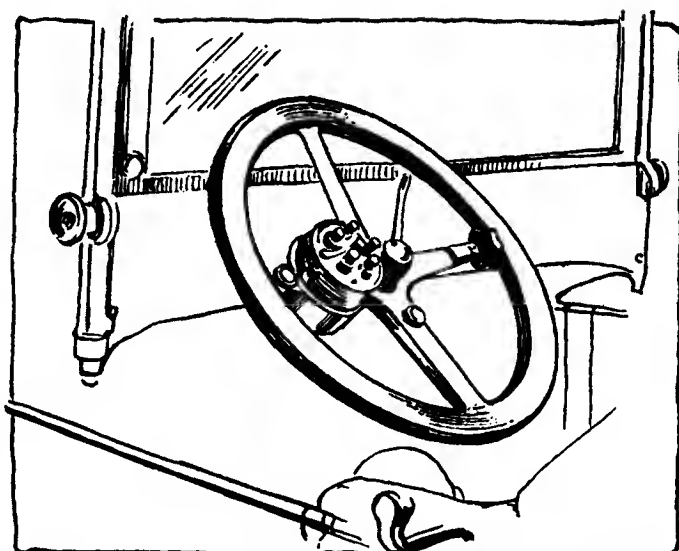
Arrangement of buttons for Vulcan gearshift on S. G. V. demonstrator
